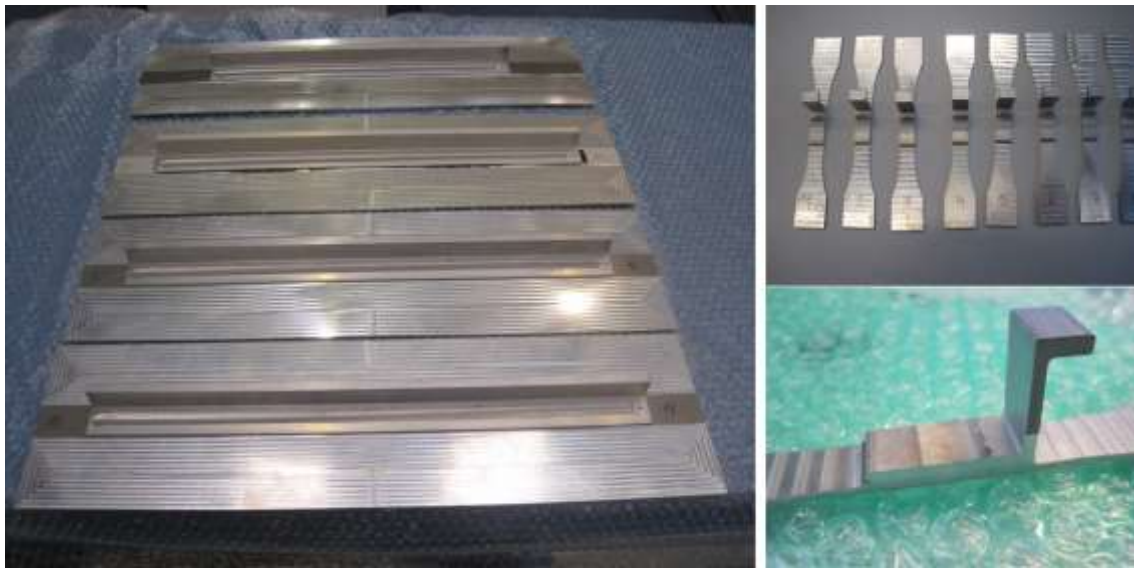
FSLW joint-coupons manufactured using pocketed AA2198-T8 sheet/skins (left), specimens for static tensile and fatigue testing machined from the coupons (top-right) and detail of a machined specimen showing the pocketed region (bottom-right).
